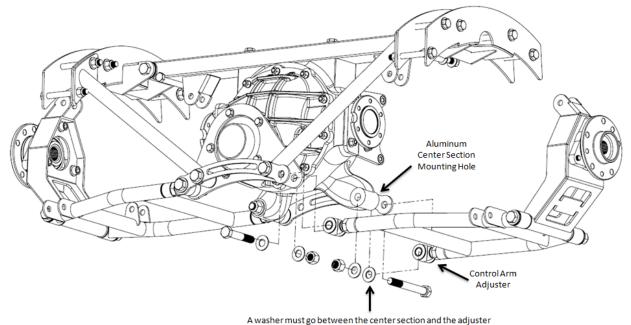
Exploded view of the driver side lower control arm assembly being installed.
